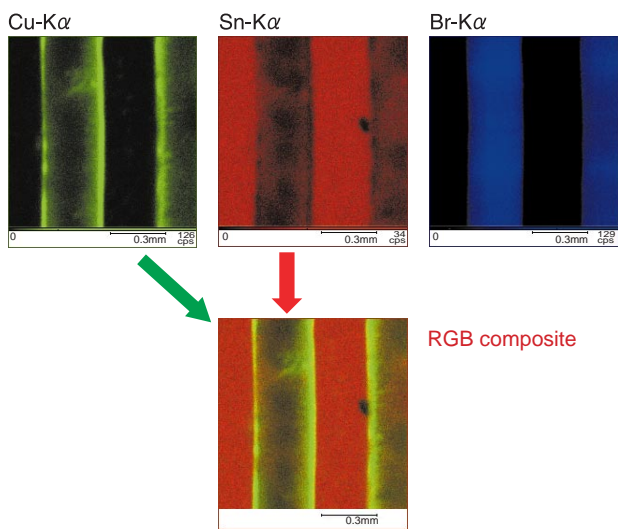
X-ray Fluorescent Images of the Connecting Area on a Print Board Using Lead-Free Solder
